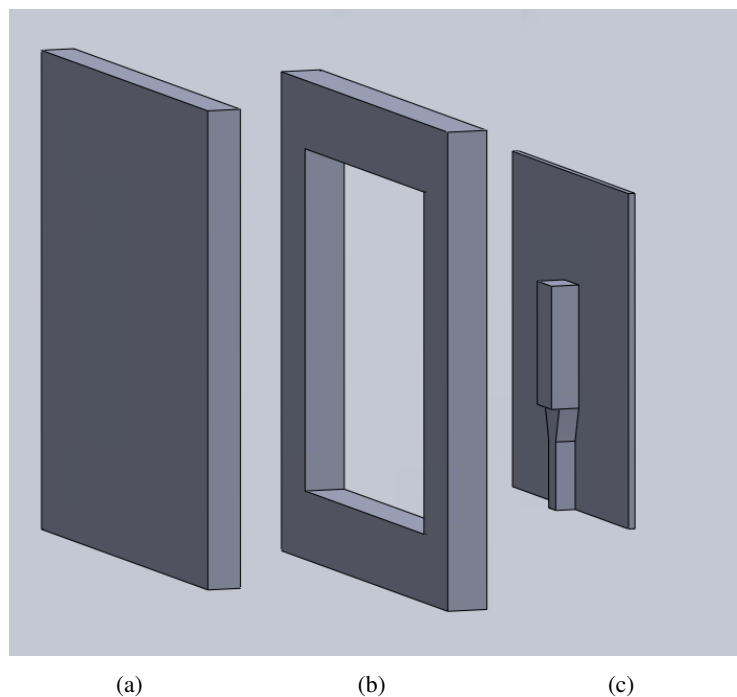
Samples' Solidworks® models for compression moulding. (a) Lower mould. (b) Middle mould with 6 mm thickness. (c) Upper mould with varying thickness.
